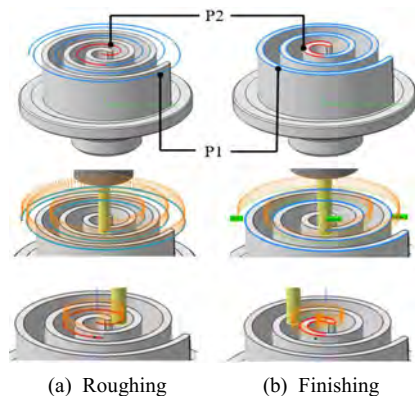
Fixed scroll machining area division considering cutting resistance analysis
